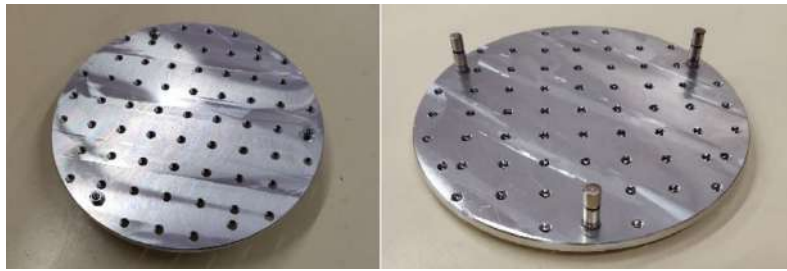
Levitant platform with the three permanent magnets stuck assembled (left) and bottom view (right)
